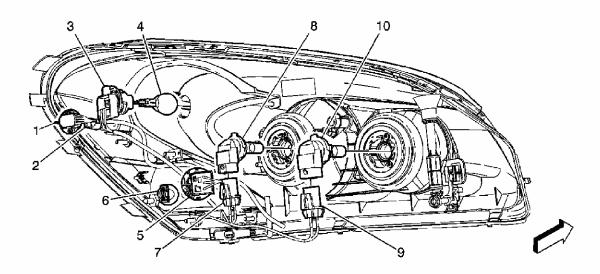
View Of Headlamp Bulb (w/Cornering Lamp) Courtesy of GENERAL MOTORS CORP.
